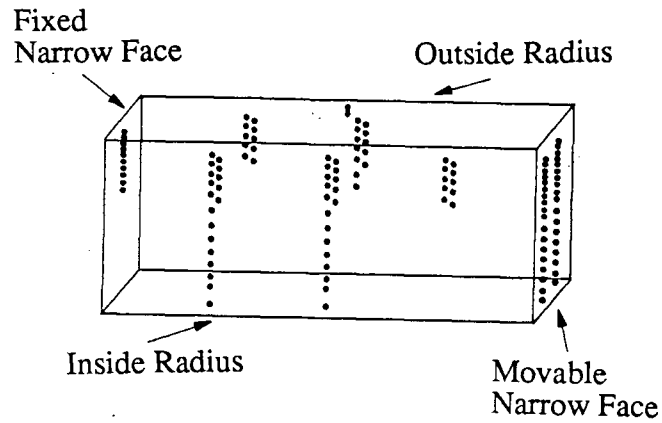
Schematic drawing of the mould showing the location of the thermocouples on the four faces.
